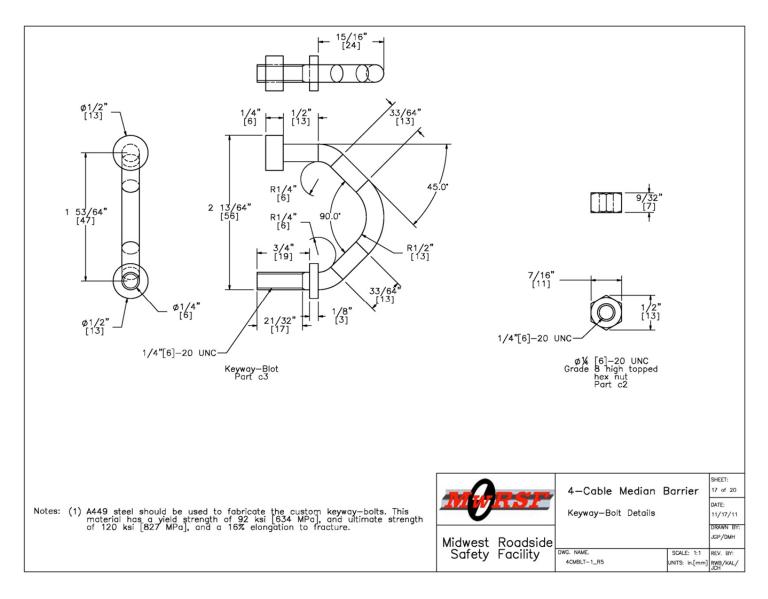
Keyway Bolt Detail, Test No. 4CMBLT-1
